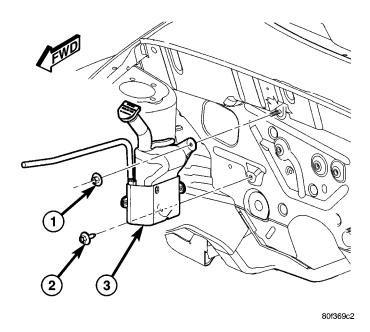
Coolant Recovery Container - 2.4L Turbo
